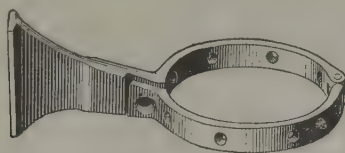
Adjustable Marker Arm. Peter Gray & Sons.
